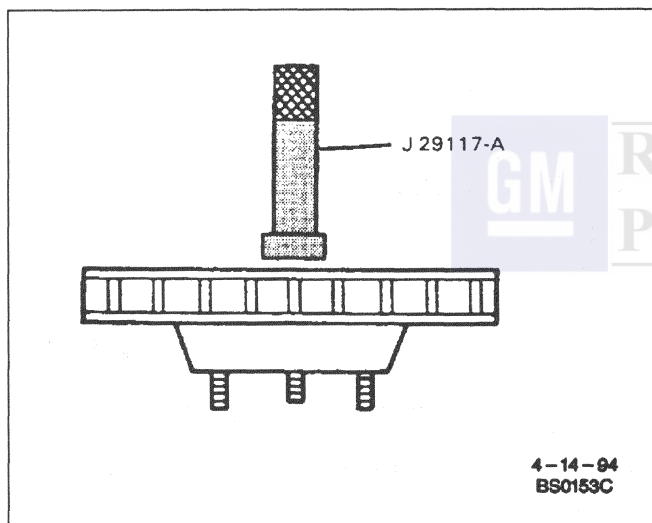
Removing Front Wheel Inner and Outer Bearings
